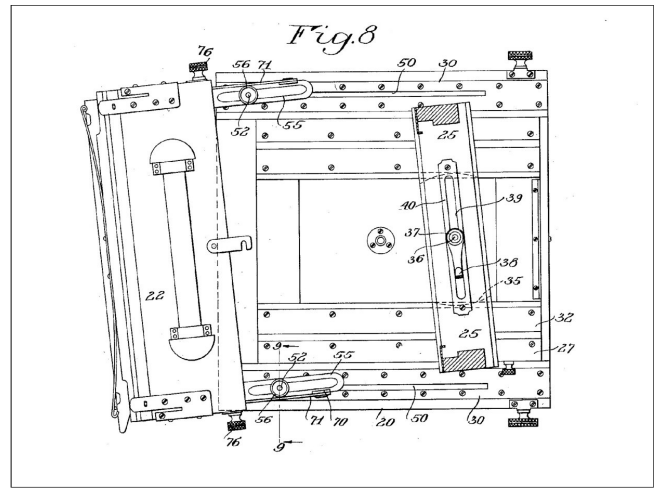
is a patent illustration of the camera, with parts omitted and parts in horizontal section.
